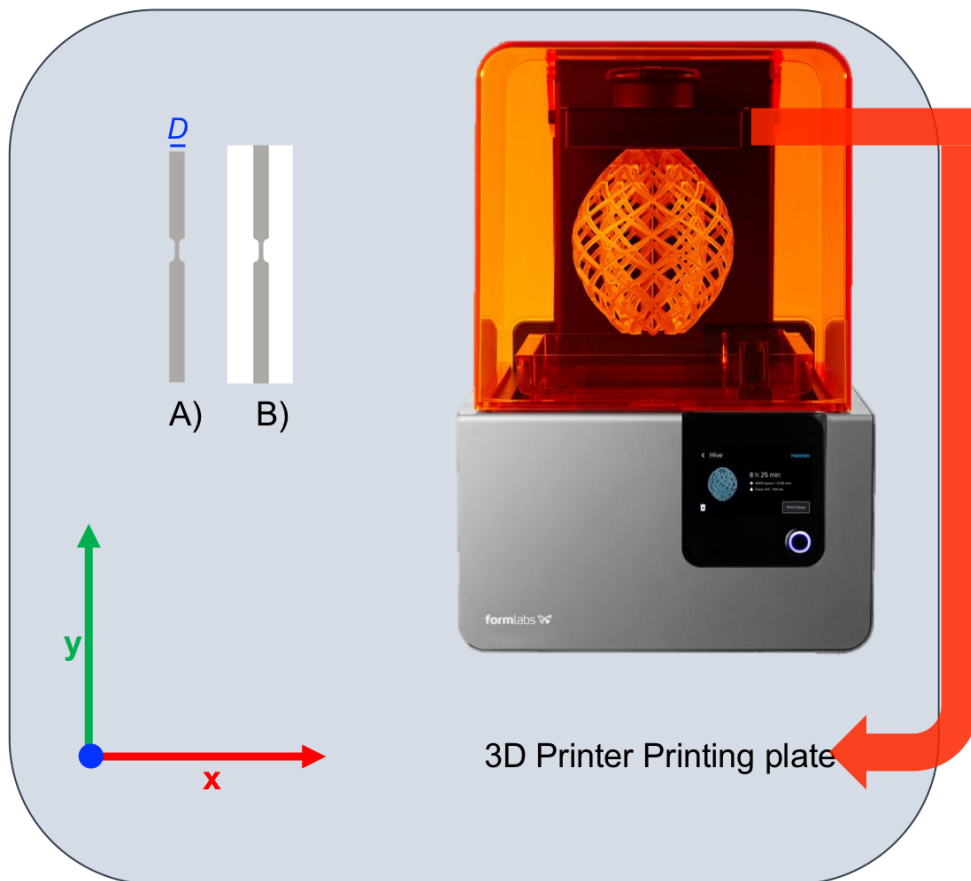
A not to scale picture showing the Form 2 3D laser printer used for the fabrication of the cylindrical devices, along with geometry orientation on the printing place A) without a base and B) with a base. The printing direction is a raster along the x, y plane. $D = 1\text{ mm}$
